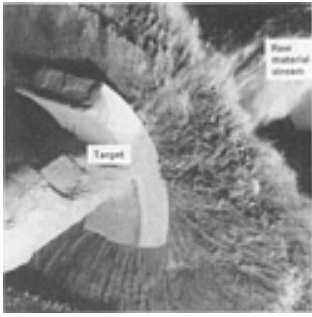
Raw material steam impacting a target and shattering in Coldstream impact process
